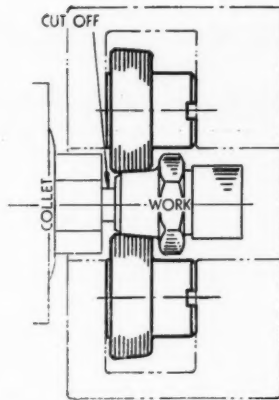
Rolling taper pipe threads behind shoulder on collet end of work
